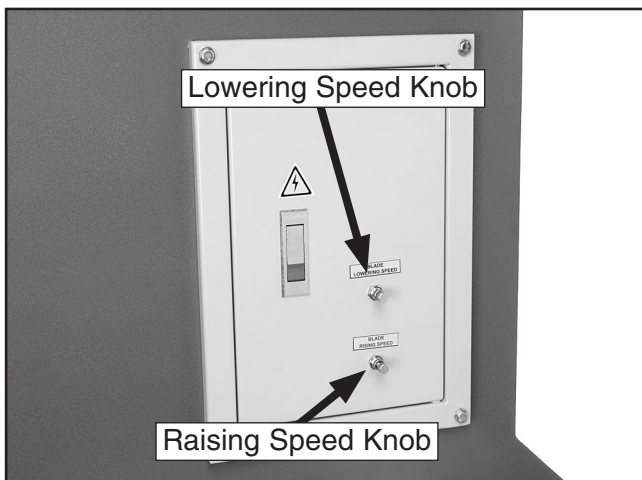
Saw blade lowering and raising speed controls (on right side of machine).
